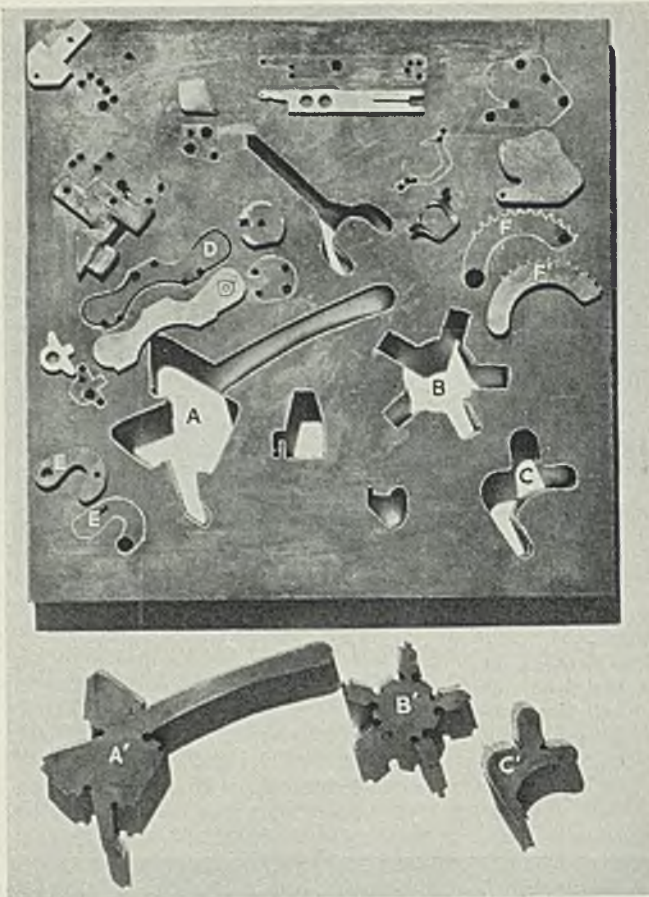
Here are shown a number of specimens of dies sawed with the narrow-blade band sawing machine
